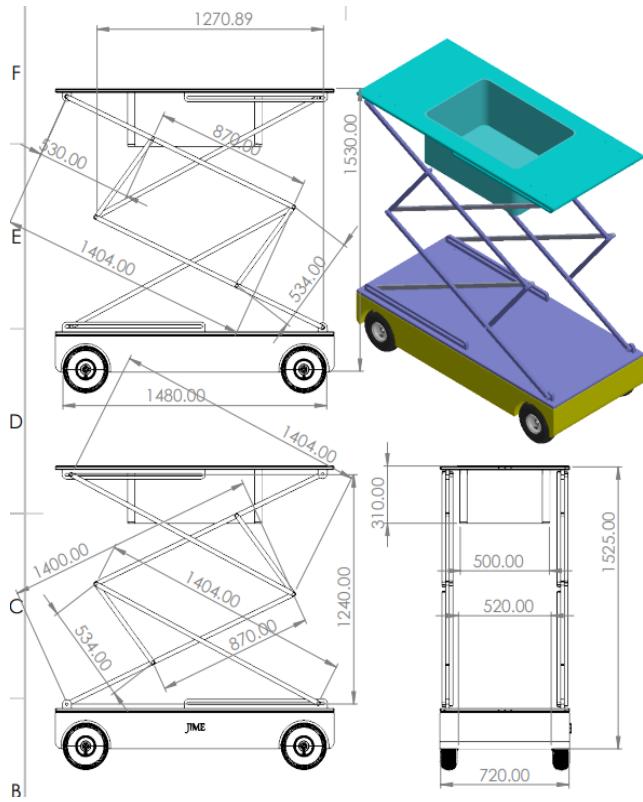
Mechanical blueprint detailing dimensions and structural layout of the mobile fruit-harvesting robot platform.
